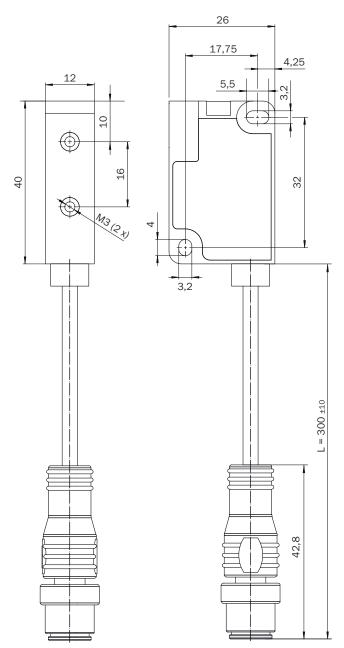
IQB2S12-BQ9 dimensional drawing
